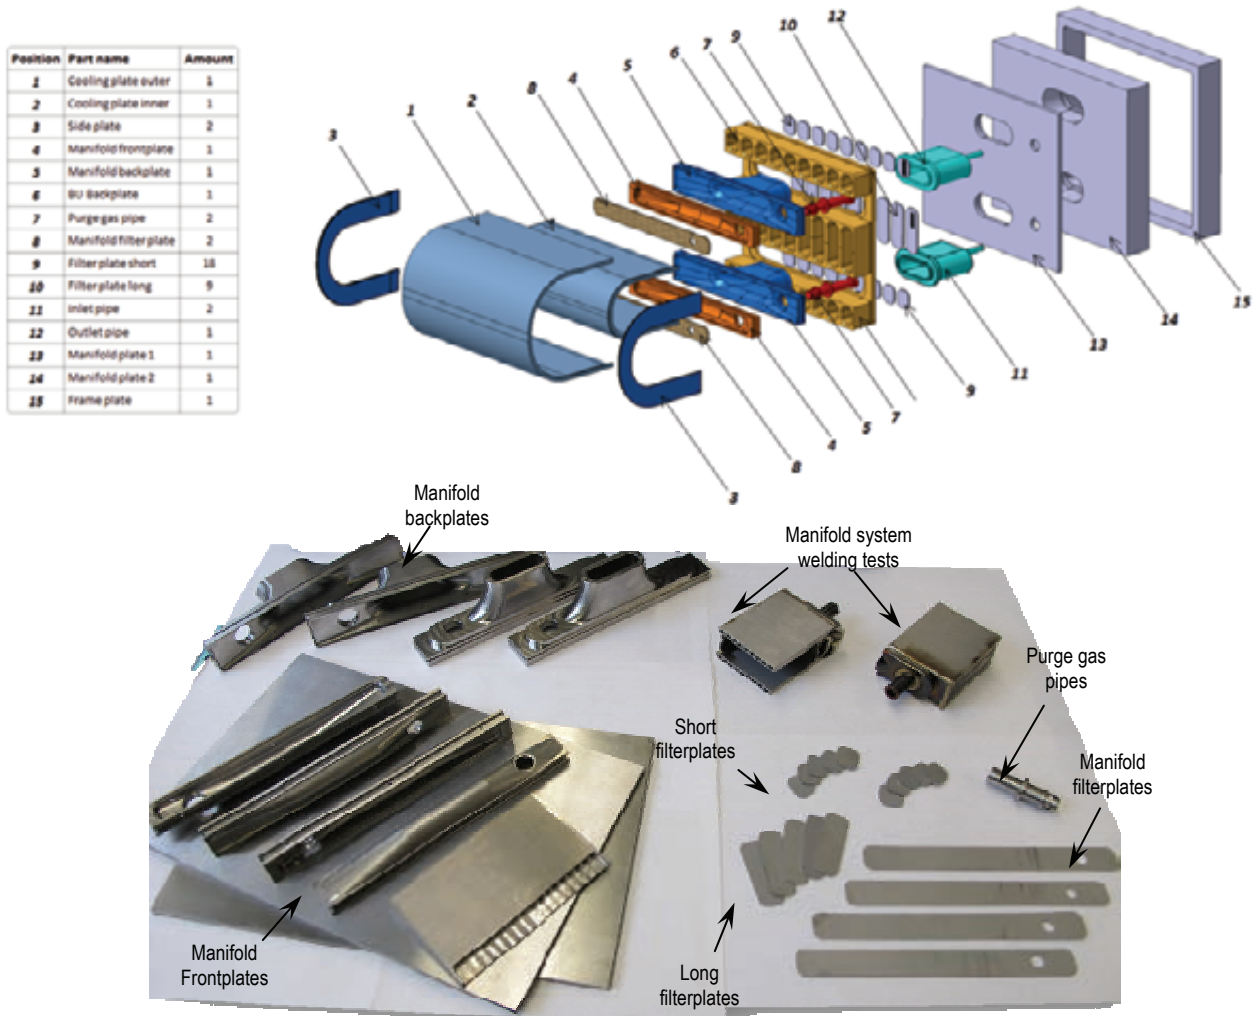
Explosion view (top) and picture of different manufactured components (bottom) of SHOBU.
